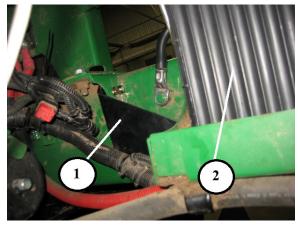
RH Side Mounting Location Key 1 – Rear Shield RH Support (RC101207-2)
